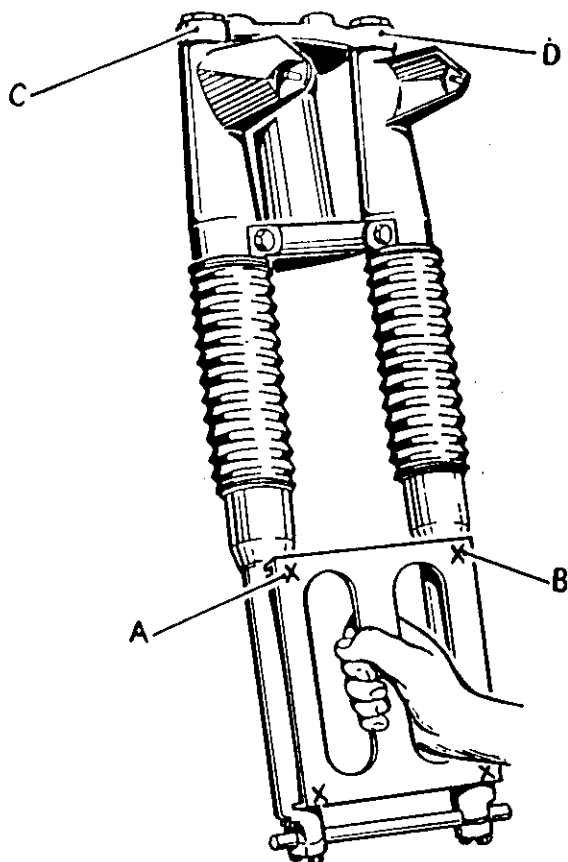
Checking fork alignment with service tool No. 61-6025.
